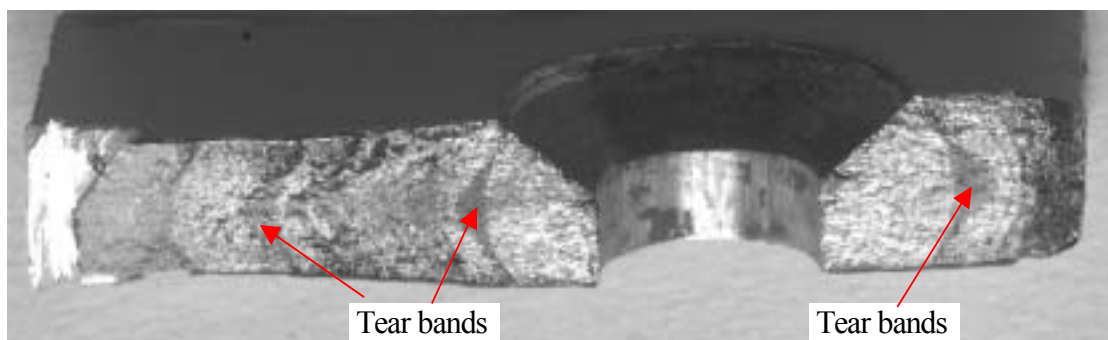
Fracture surface of a cracked part of the wing panel of TRANSALL showing the tear bands.
